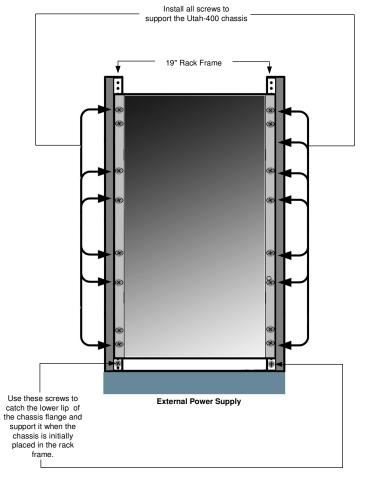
Utah-400 Chassis Mounted in 19" Rack Frame
